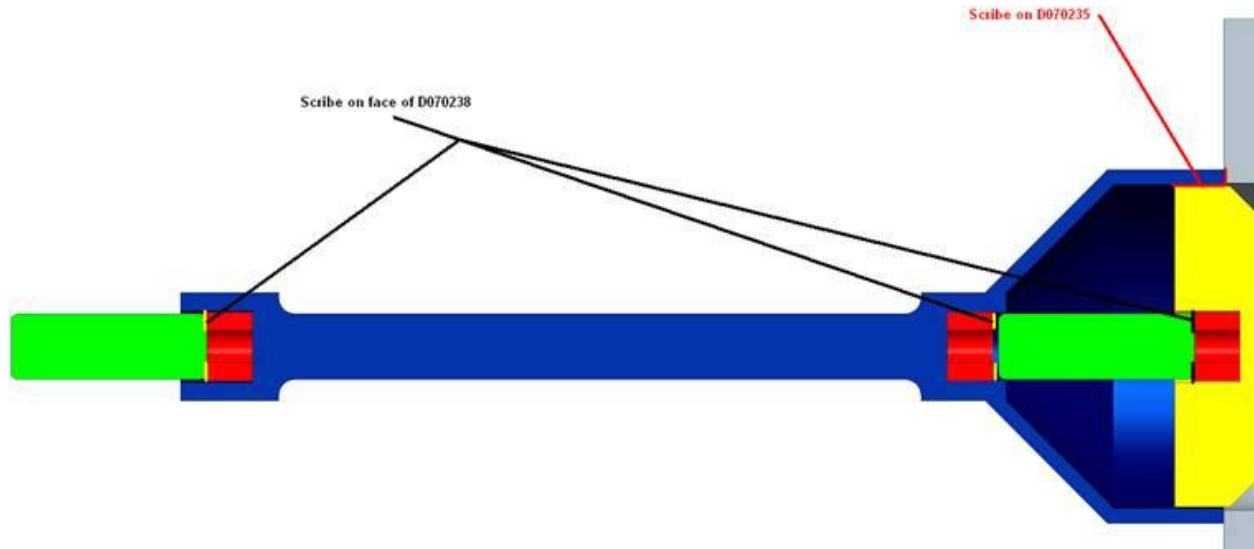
Penultimate Mass Magnet & Flag Holder Assembly (D080580)
